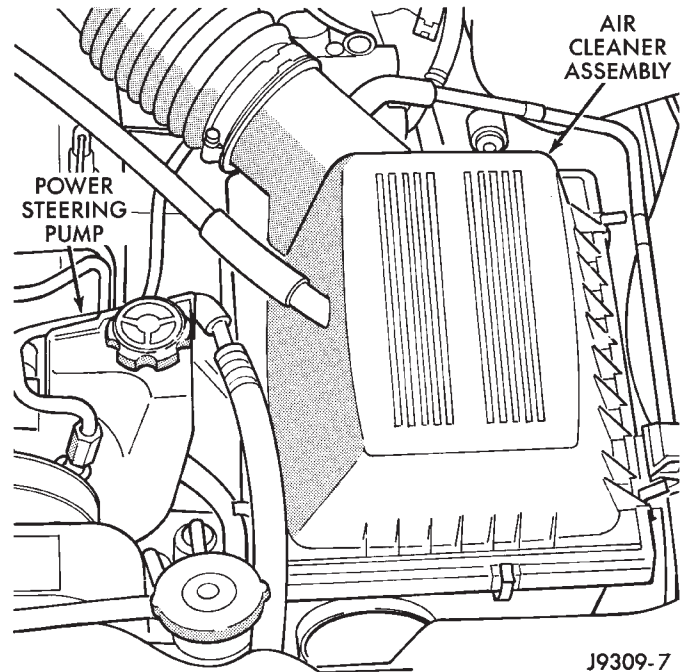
Air Cleaner Assembly & Power Steering Pump
